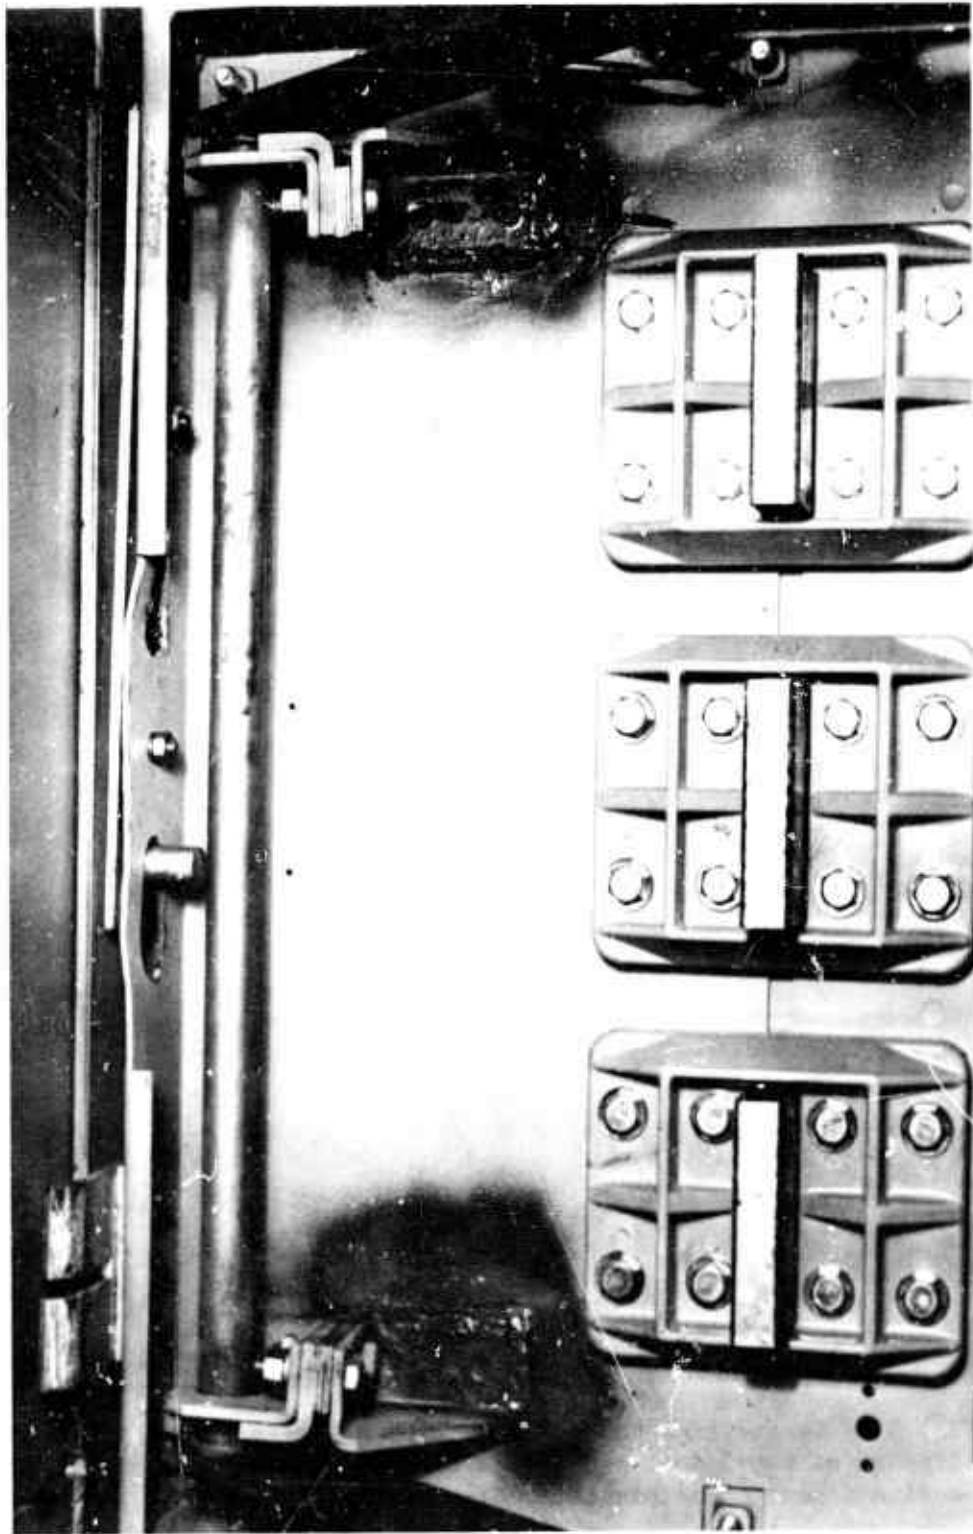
Damage from Shock Test - upper 1600 A Breaker Compartment. Damage to breaker support frame.
